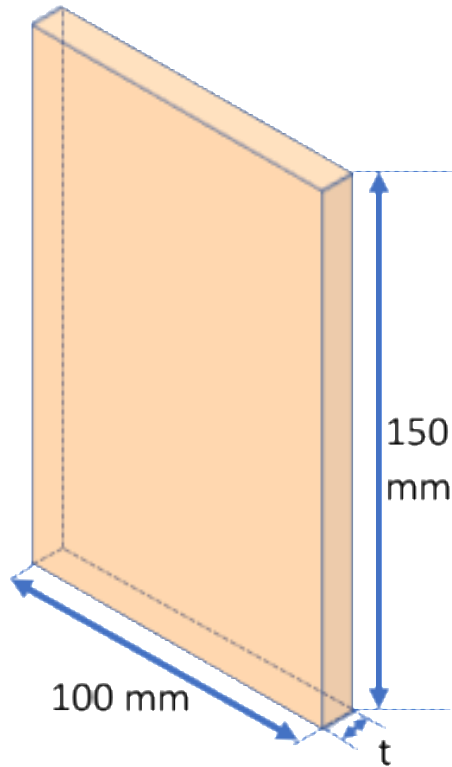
A schematic drawing of the material plaque and dimensions.
